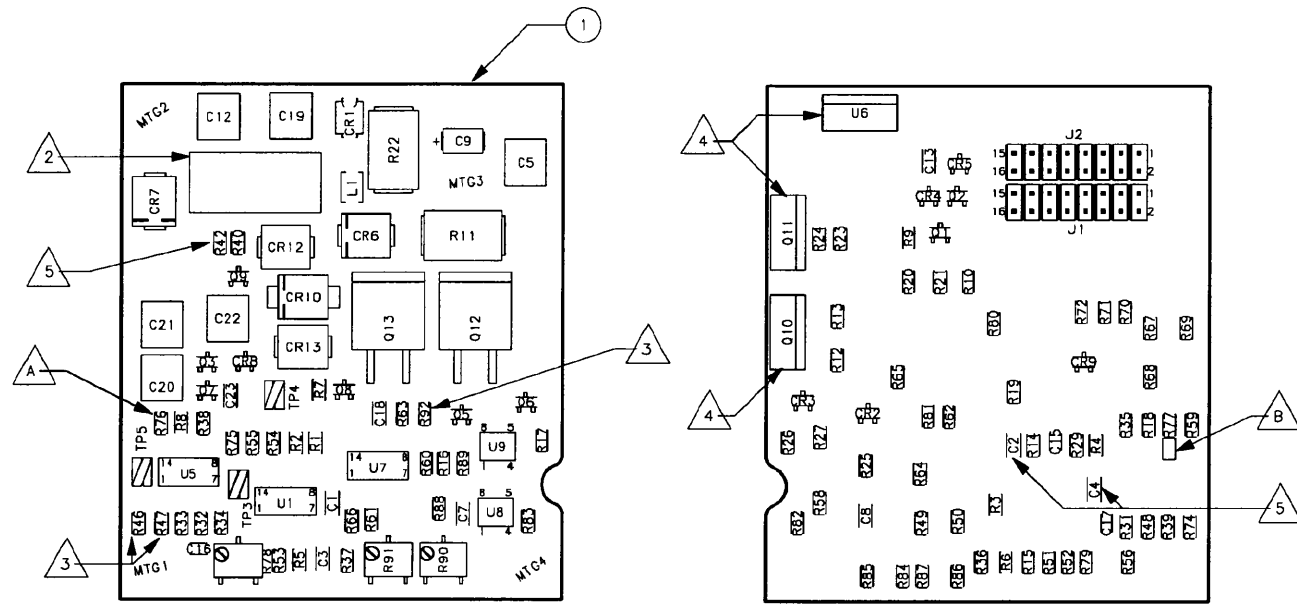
SERVO BOARD ASSEMBLY DWG 300-09366-0000 (Dwg No 300-09366-0000, Rev AD, Sheet 1 of 1)
